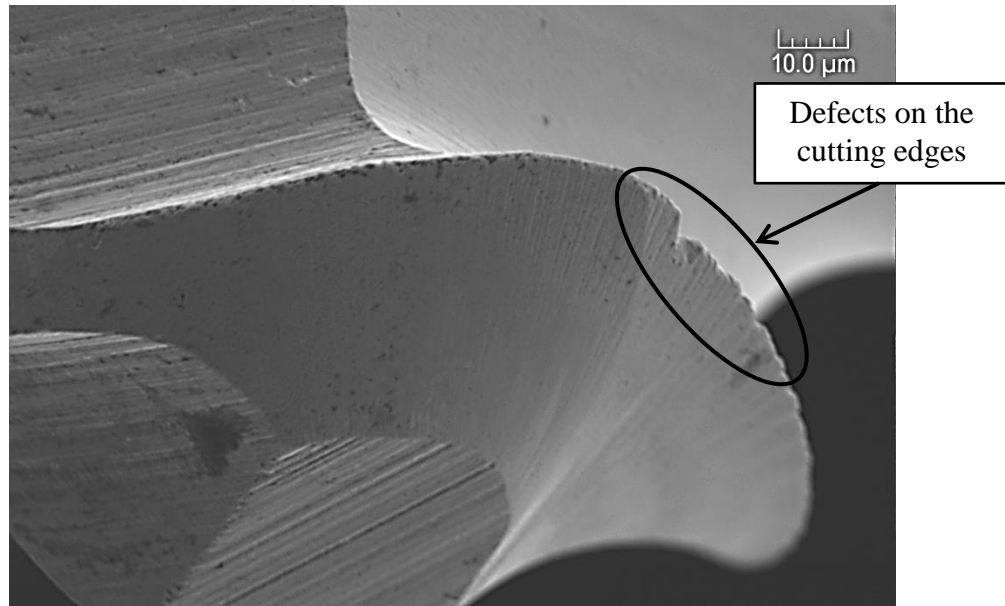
Defects on the Cutting Edges of Uncoated Tool  $\text{\O}152\mu\text{m}$ .
